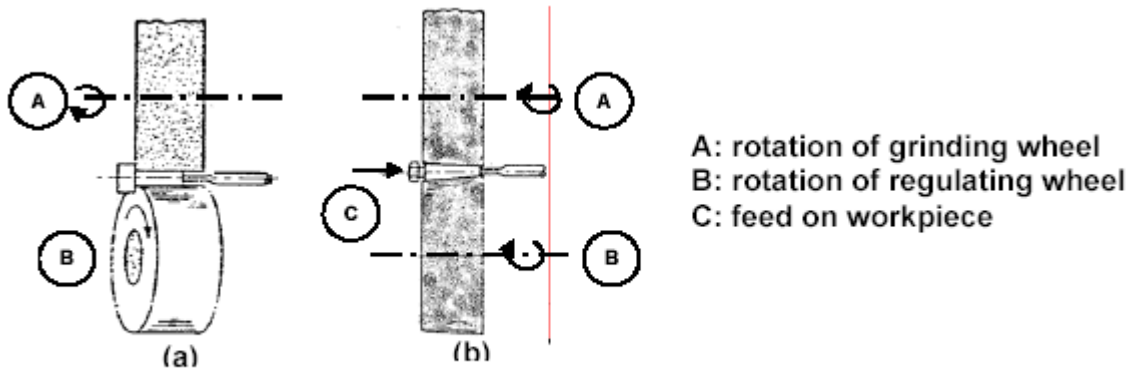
Centreless (a) infeed and (b) end feed grinding
